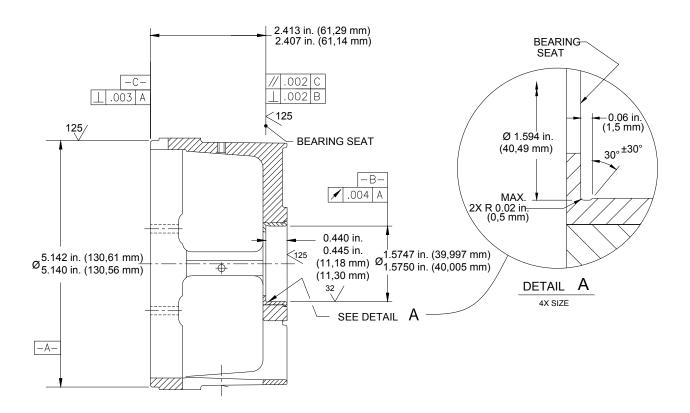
Anti-Drive End End Bell Bearing Liner Machining Specifications (IPL 10002, P/N 23081-3320/-3322)
